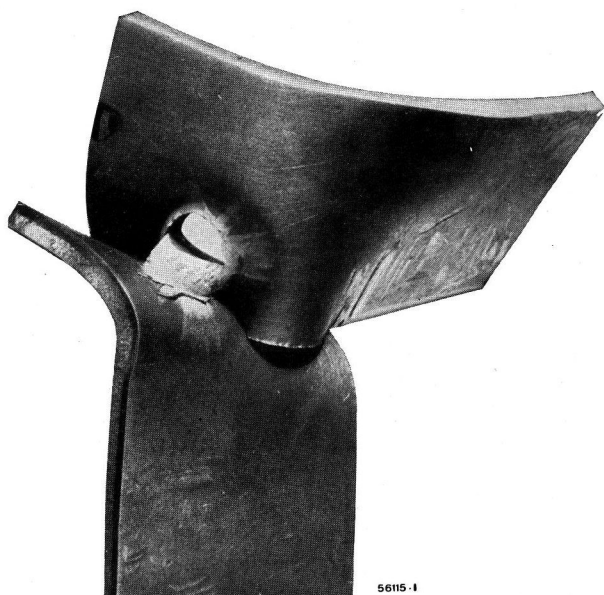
Result of tensile test on two spot-welded 3 mm steel sheets. It will be noticed that the welded joint is stronger than the individual sheets.
